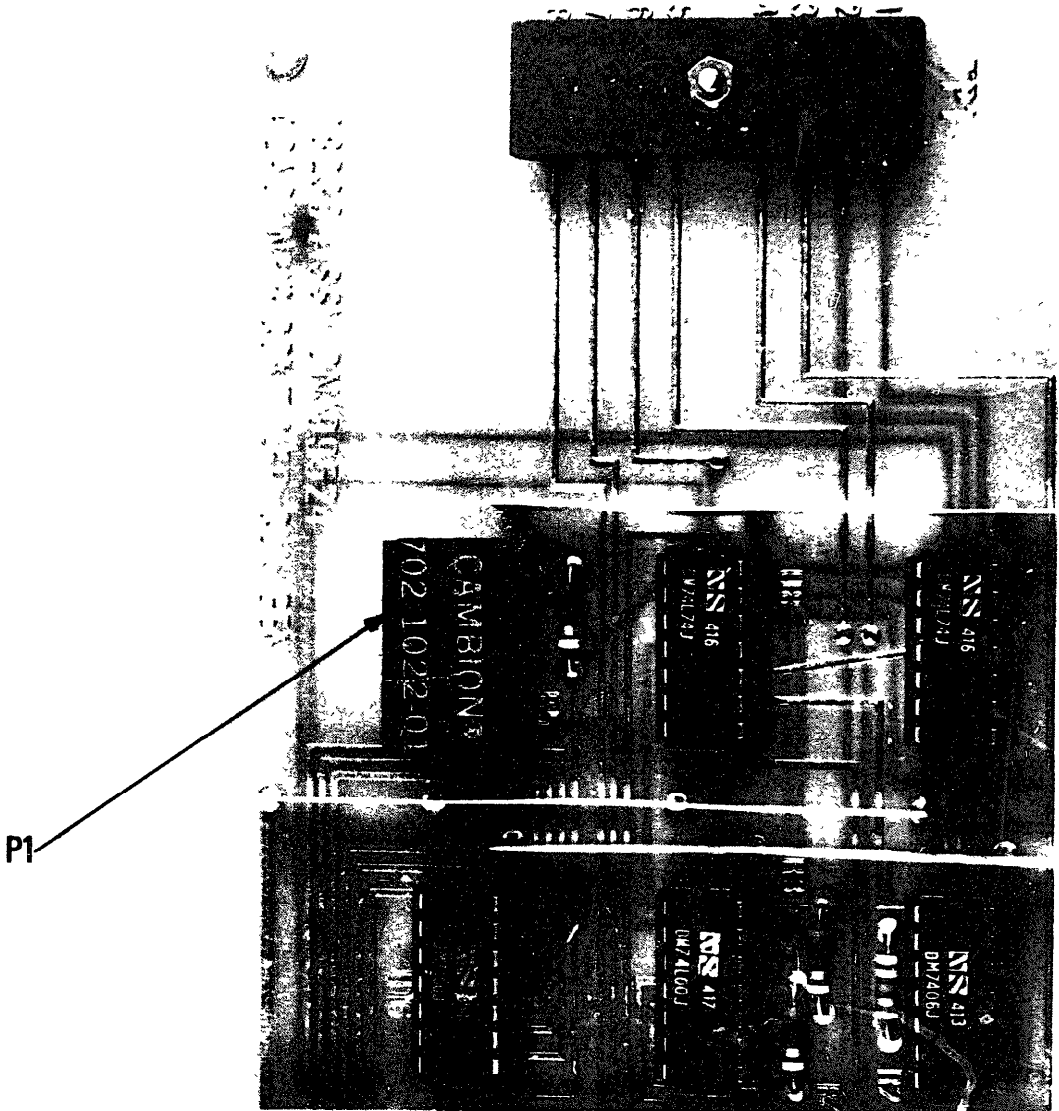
Inhibit Control Transfer Clock Generator Assembly A2A3
